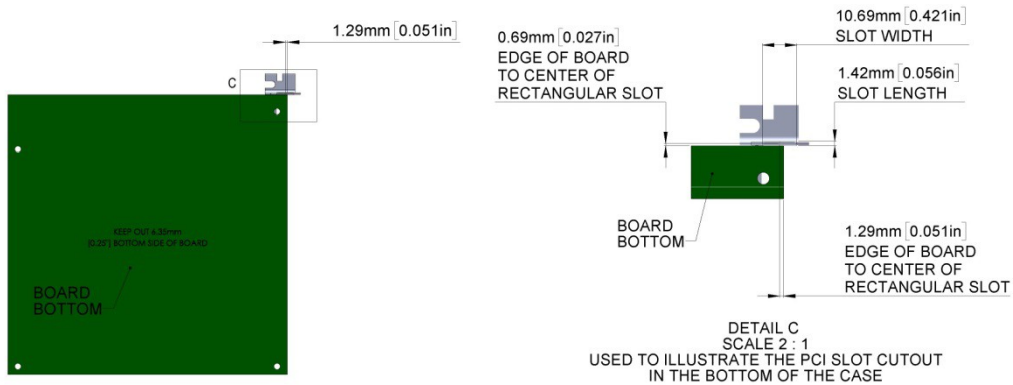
Mini ITX board bottom view, with dimensions for a rectangular slot for PCI tab.
